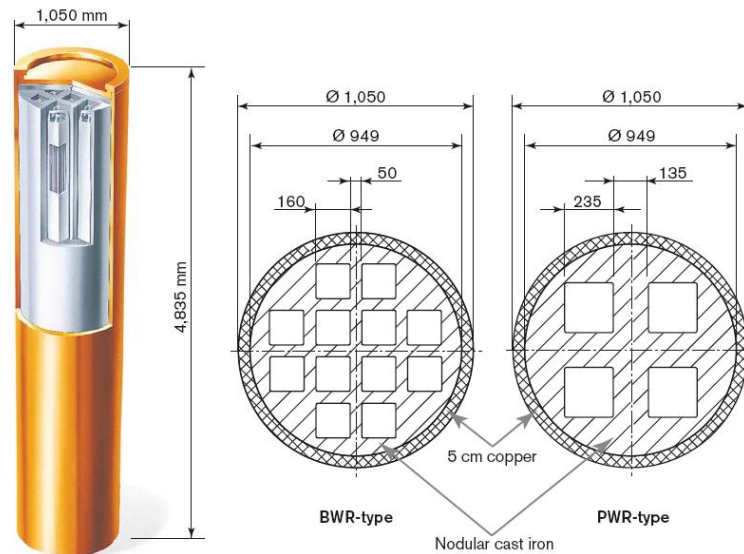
Left: the reference design with a corrosion resistant outer copper shell and a load-bearing insert of nodular cast iron. Right: cross section of insert designs of the BWR and PWR types
